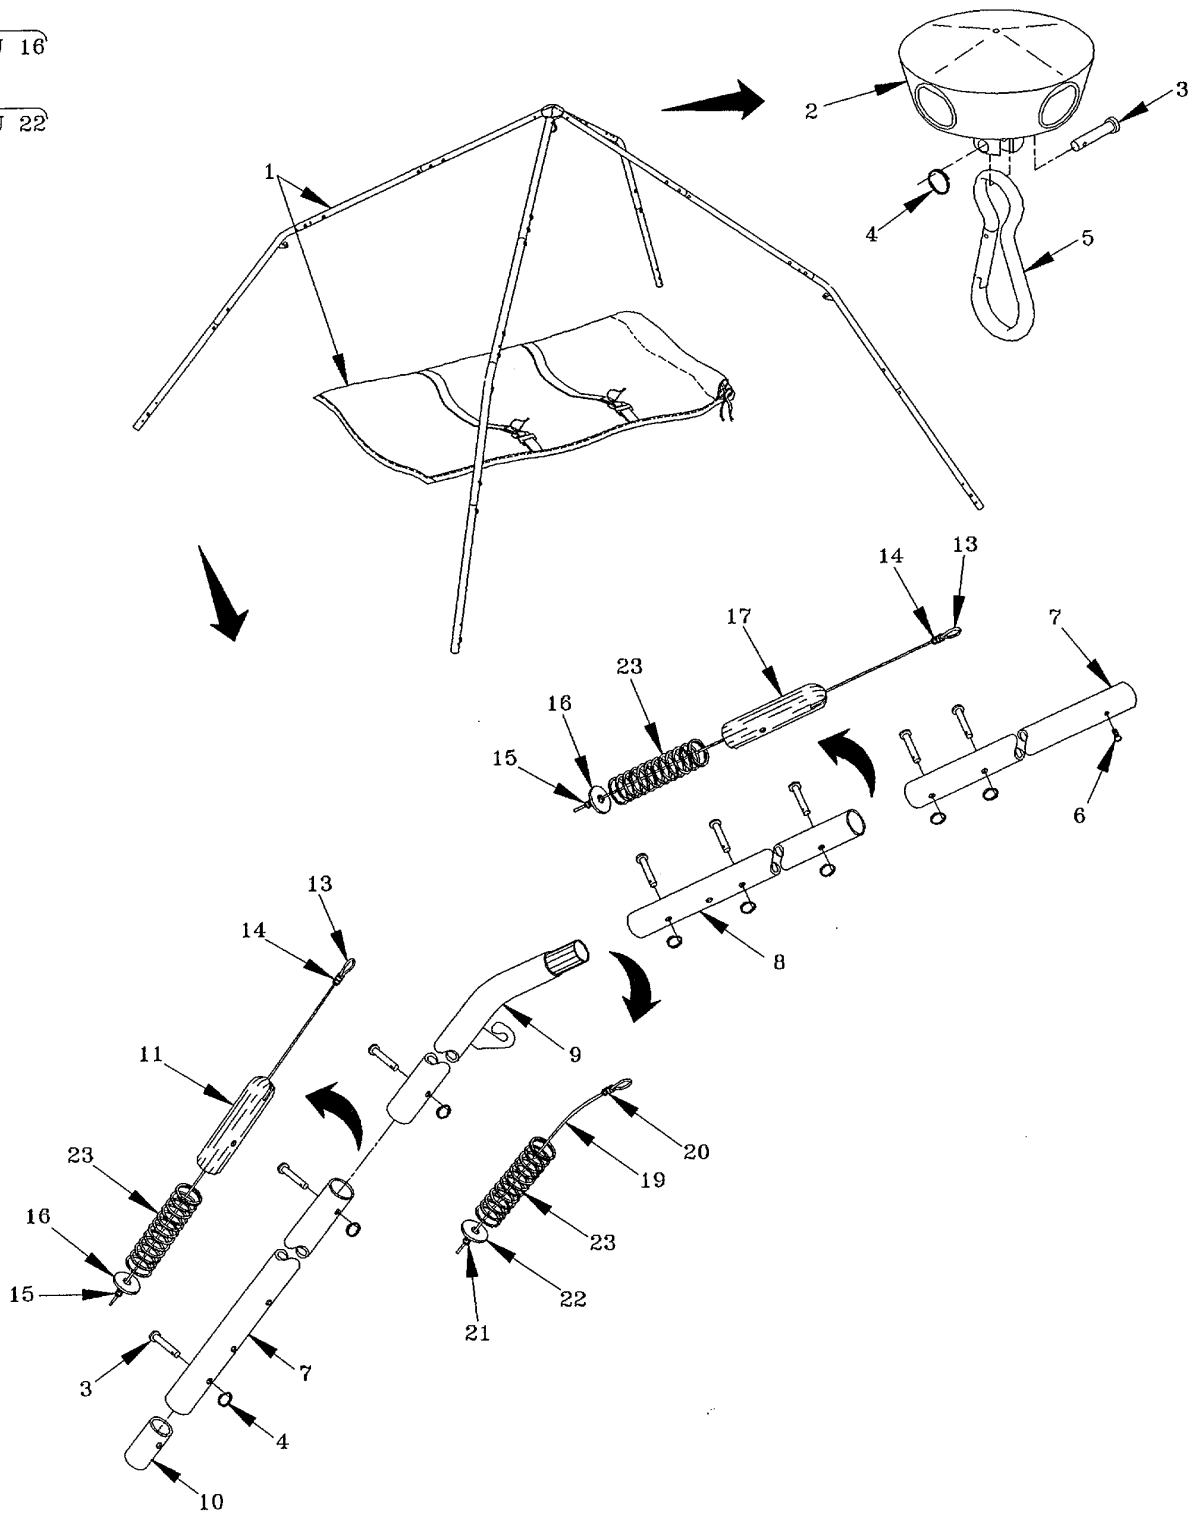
FRAME ASSEMBLY (Sheet 1 of 2)
